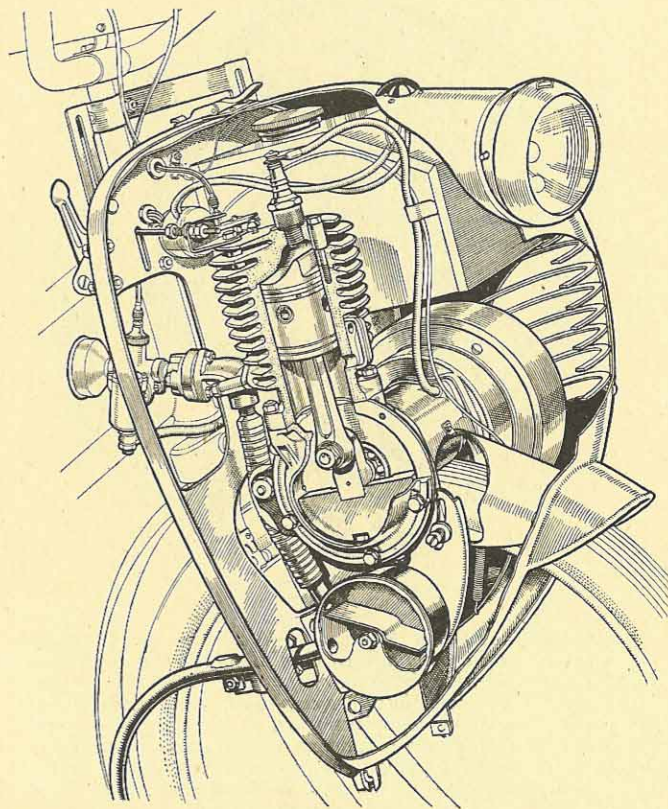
Another roller-drive design, the 45 c.c. Cymota two-stroke is also mounted over the front wheel. Rubber grommets are employed between the engine unit and the side plates which clamp on the front-fork blades. Weight of the complete, neatly cowled unit is 22 lb. Current for the electric lighting is provided automatically by means of lighting coils in the Miller flywheel magneto. Depression of a conveniently mounted lever brings the roller into contact with the tyre
